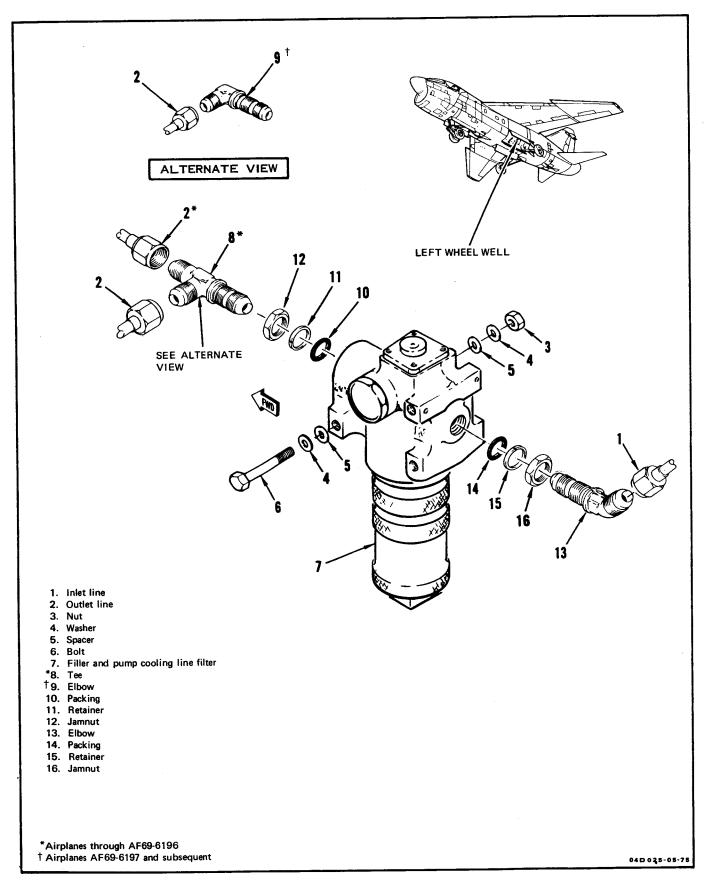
Filler and Pump Cooling Line Filter Removal and Installation
